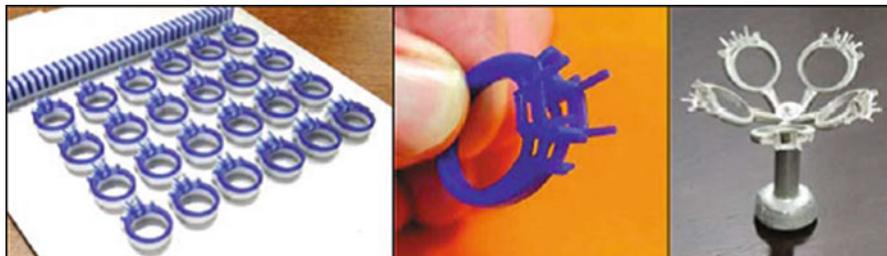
Rings for investment casting, made using a ProJet[®] CPX 3D Printer (Courtesy 3D Systems)
